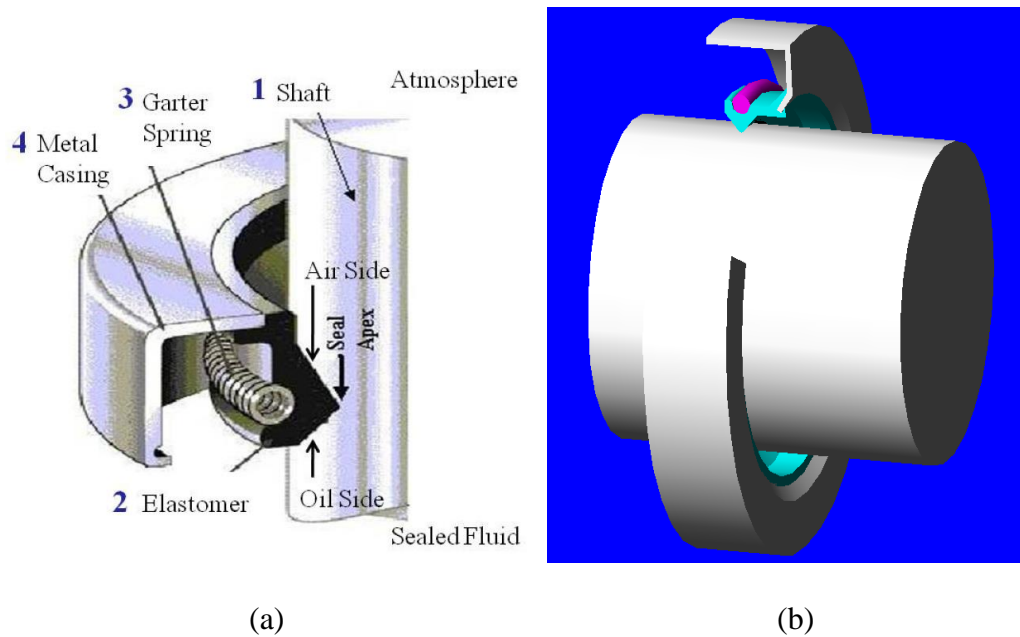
(a) Components of the lip seal (from Chicago Rawhide), (b) lip seal and its mating shaft
